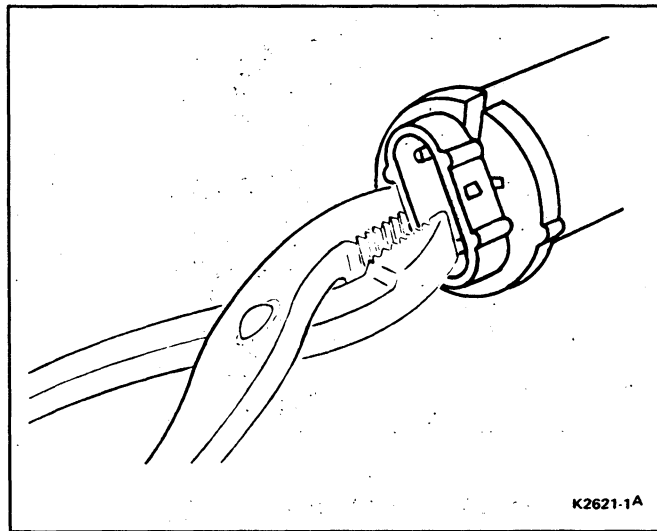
Disassembling Motor, Seal and Impeller Assembly
